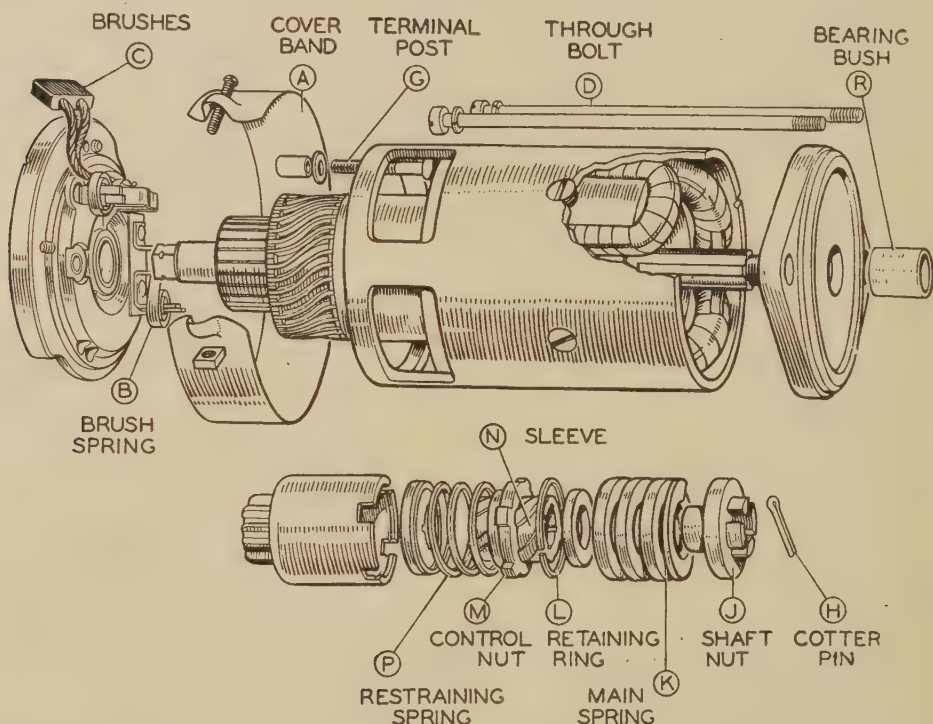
The Lucas Type M35G Starting Motor, in Partly Dismantled View
